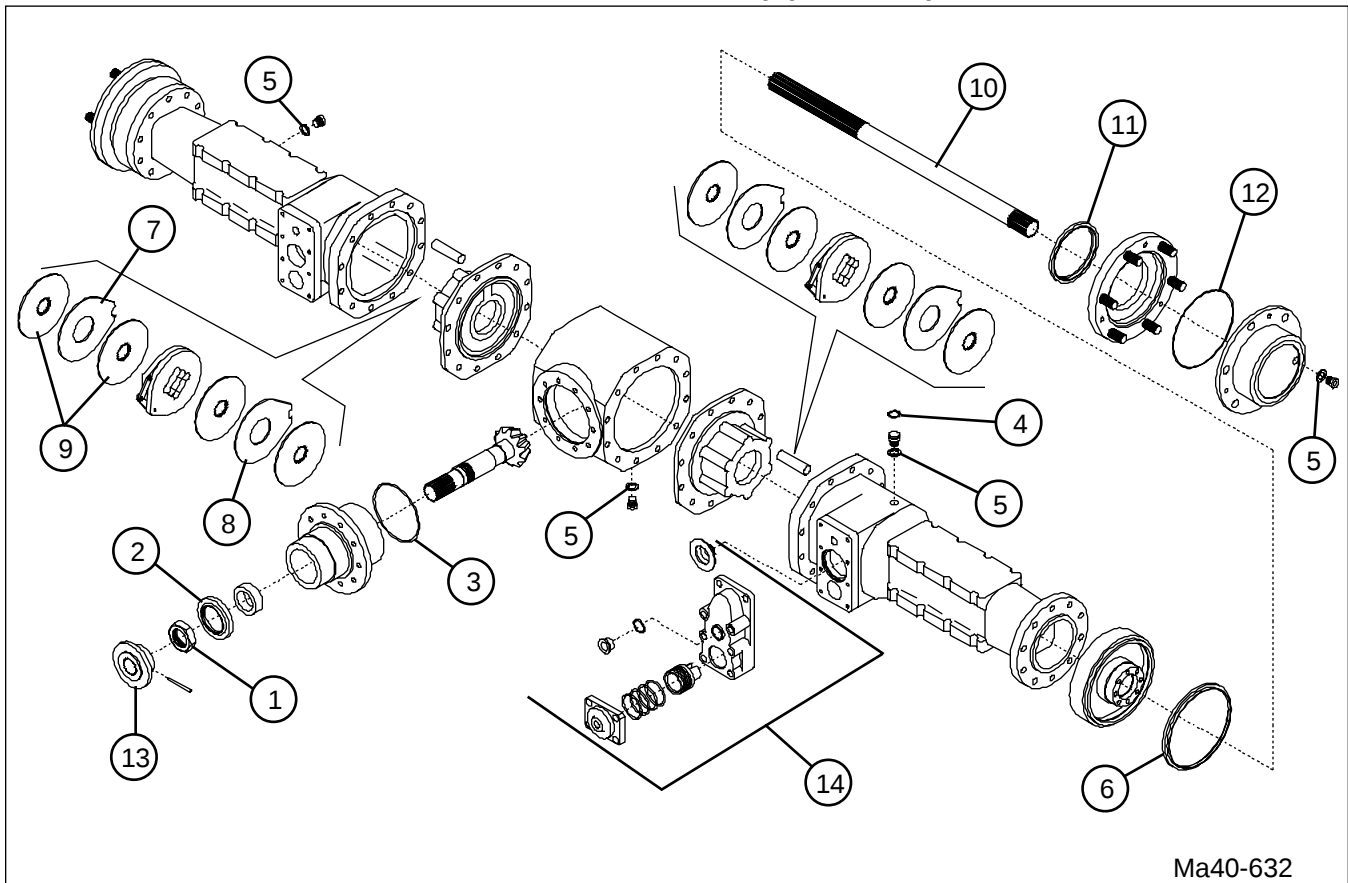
TRANSFER CASE ASSEMBLY (Optional 4x4)
